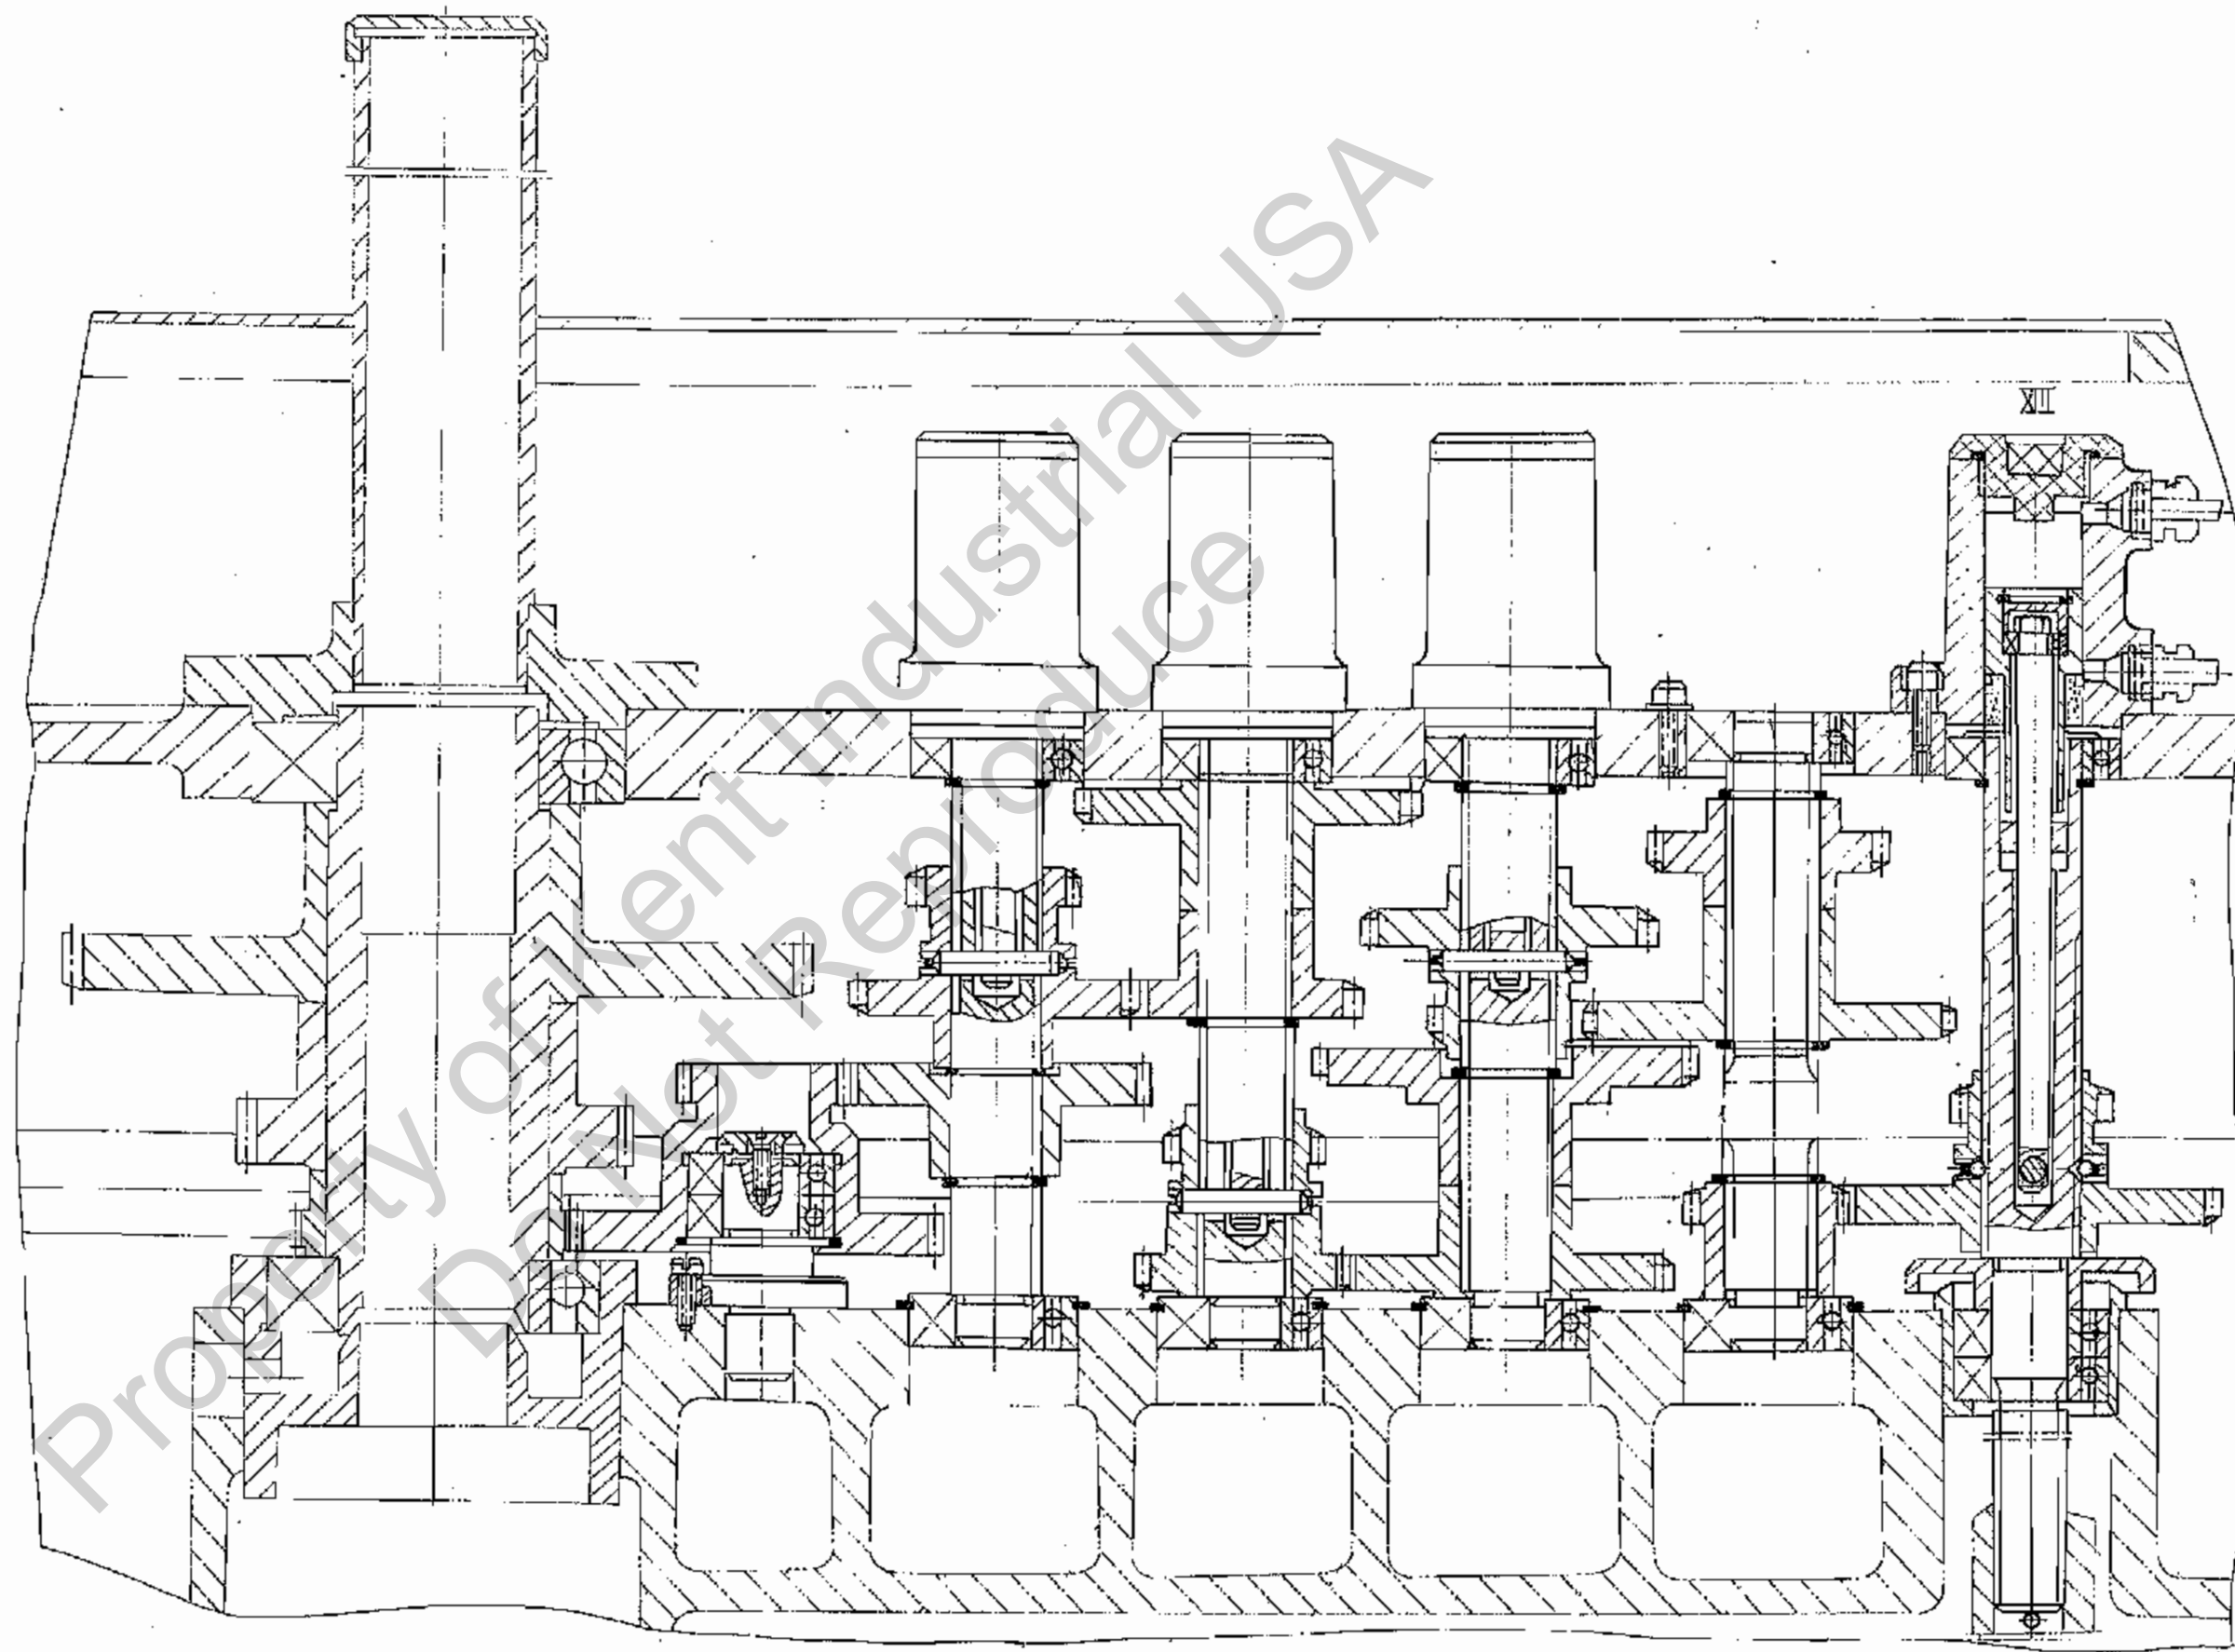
Stretch Drawing of Spindle Feed Change Mechanism
